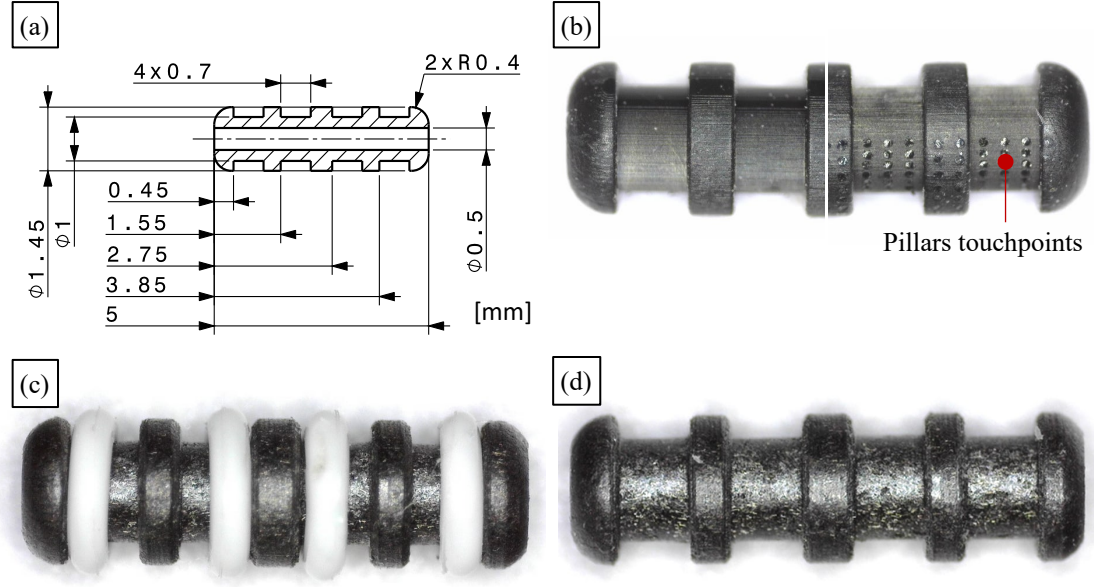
Seal fitting of the radial seal solution. (a) CAD drawing of the seal fitting cross-section, (b) first samples 3D printed and (c-d) CNC machined samples with and without O-rings. As proof of concept, seal fittings were 3D printed in ABS-like material (N-800 [184]) produced with Micro Digital Light Processing (DLP) AM system technology by Nanodimension Fabricagroup company [185] (b). The Micro DLP technology can reach 1 μm of precision. Preliminary pressure tests demonstrate that the radial interconnection withstands pressures up to 20 MPa.
